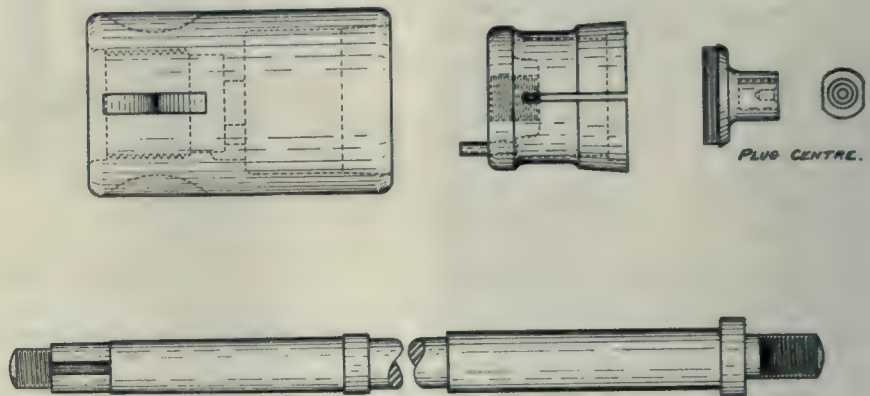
COLLET CHUCK AND CENTRE FOR FINISH TURNING.
